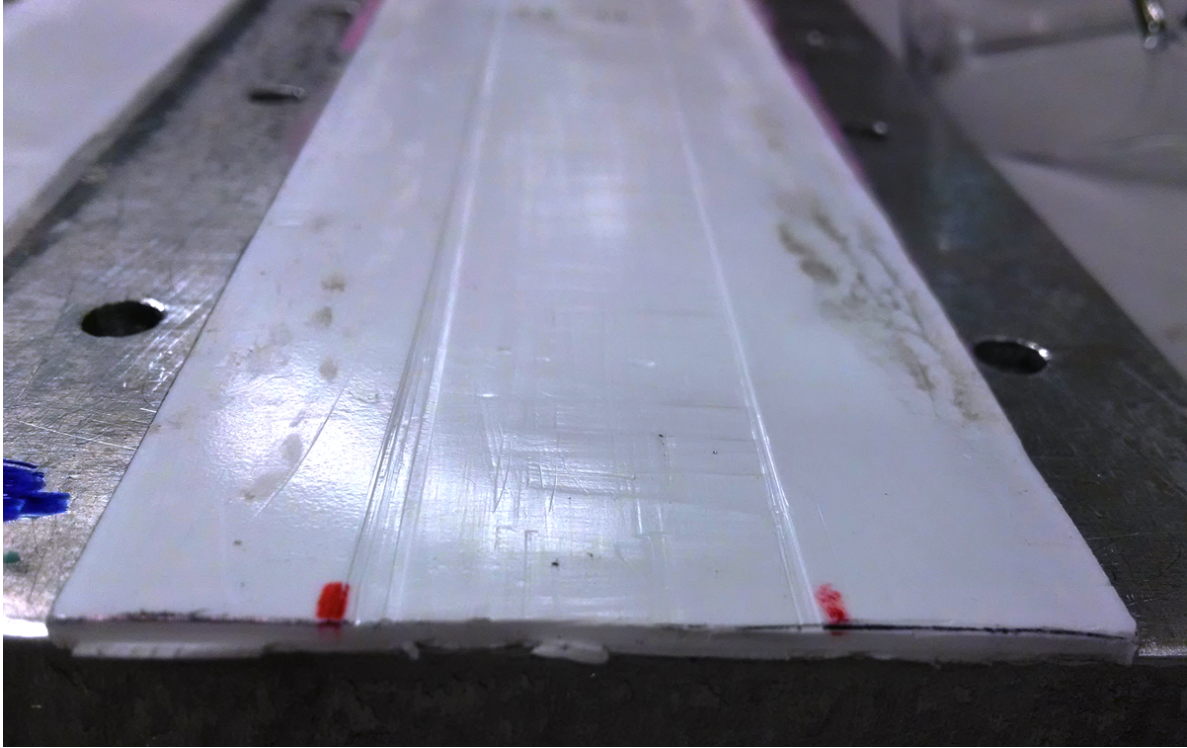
Close up of the microcellular seal material. The imprint on the surface is more visible.
